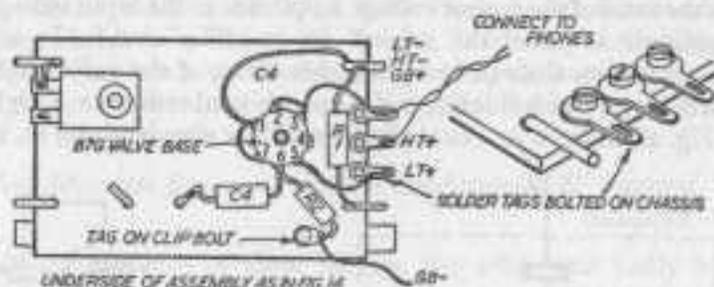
DESIGN NO. 2 IN SCHEMATIC FORM, SHOWING THE WIRING MADE TO THE B7G VALVE BASE AND USING A DL60 VALVE.
